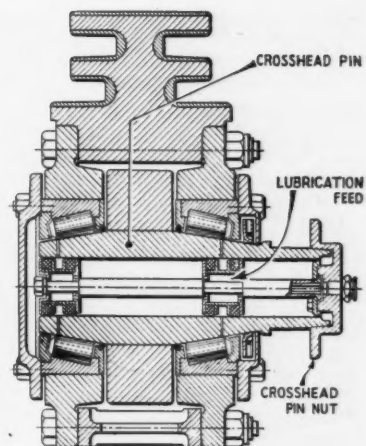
Crosshead arrangement showing gudgeon pin mounted in roller bearings, British Timken
